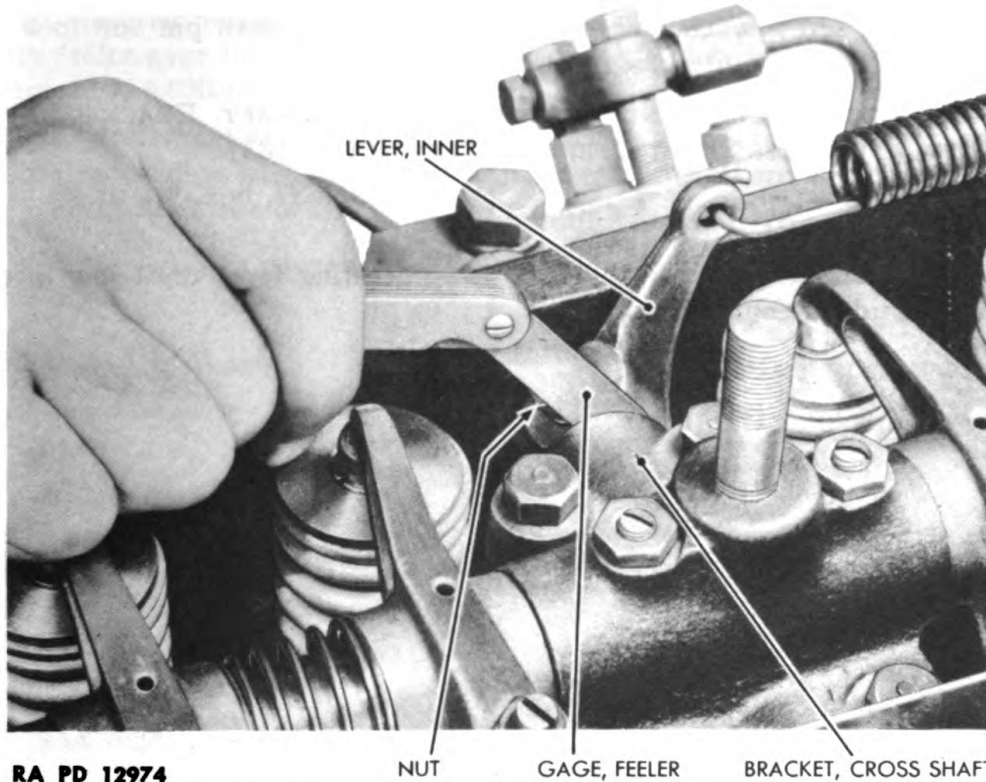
Checking Clearance of Inner Lever and Cross Shaft Bracket
